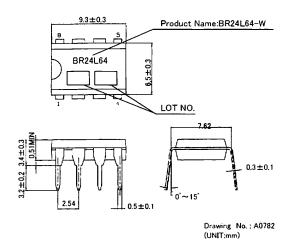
(a) PHYSICAL DIMENSION DIP8 (BR24L64-W)
